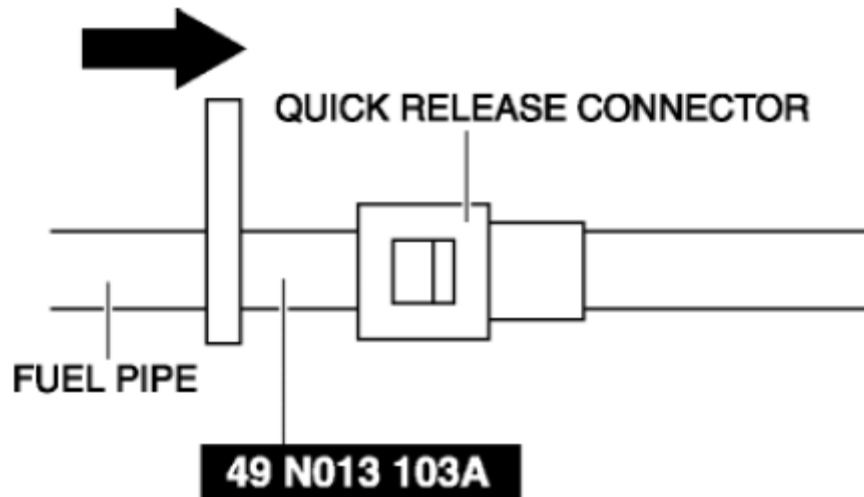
Identifying Fuel Pipe And Quick Release Connector
